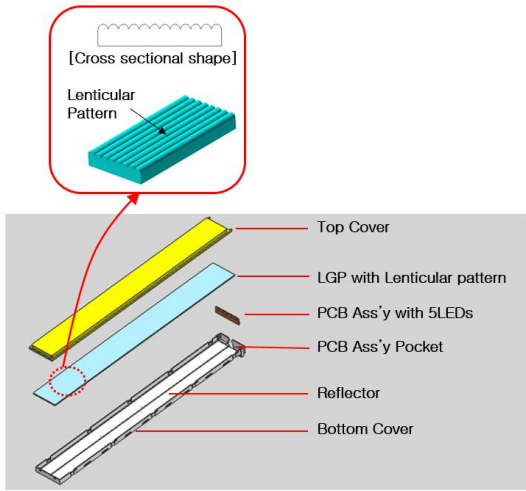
3D drawing on parts of improved LED lighting for refrigerator
